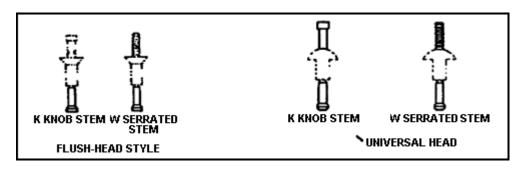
Mechanically Expanded Rivet Head and Stem Styles.
